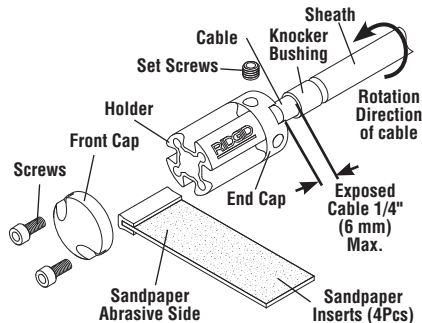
RIDGID® FlexShaft Sandpaper Attachment
